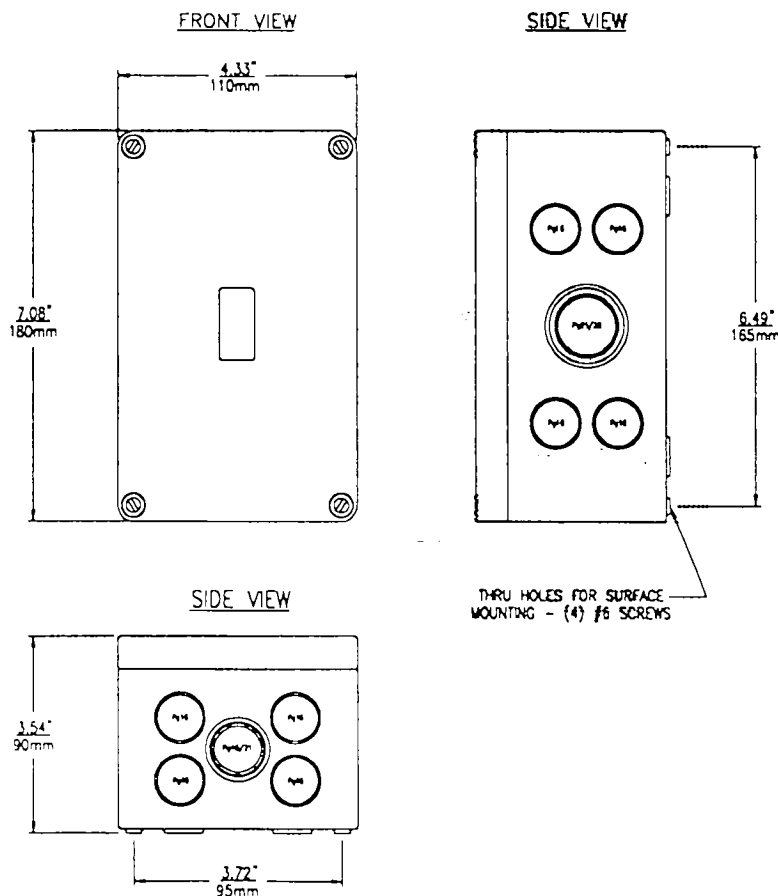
Battery Backup Enclosure Dimensions (80-0008R Rev-A)
